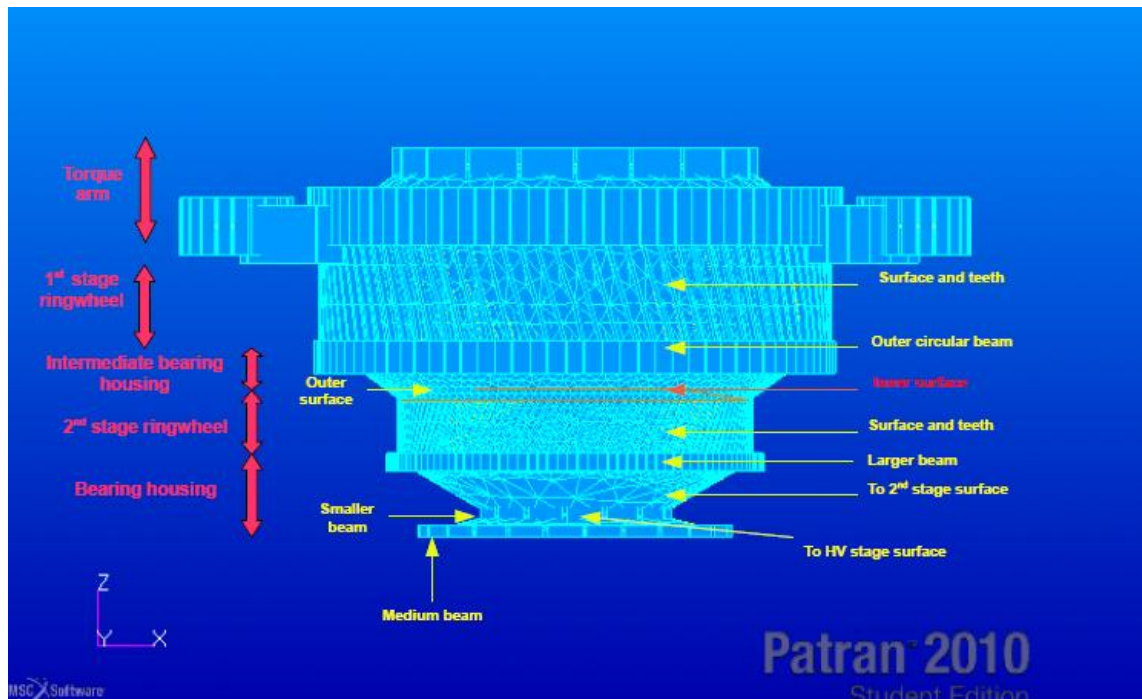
Parameters composing the 1<sup>st</sup> and 2<sup>nd</sup> stage ring wheel, intermediate bearing housing and bearing housing.
